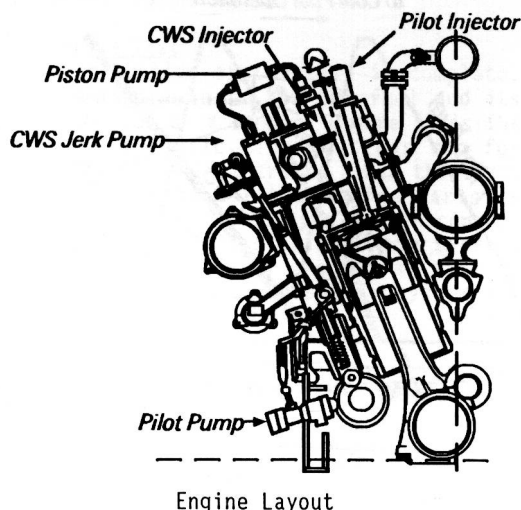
Stage I Coal Fueled Diesel Engine General Layout
